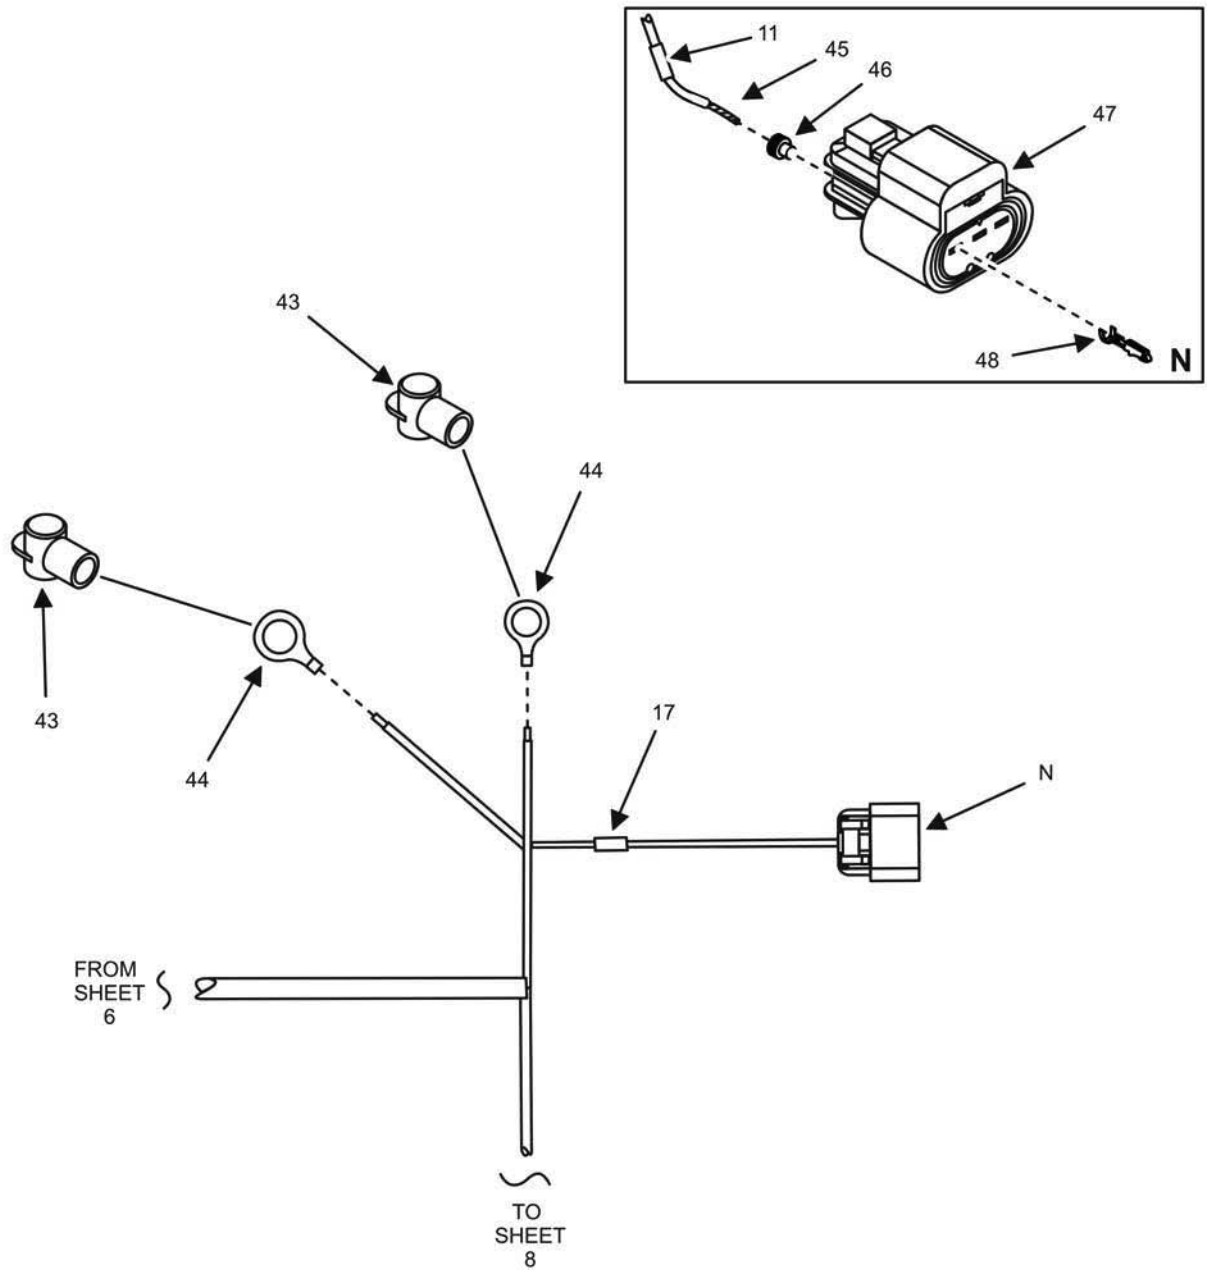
Engine Wiring Harness (Sheet 7 of 14).
